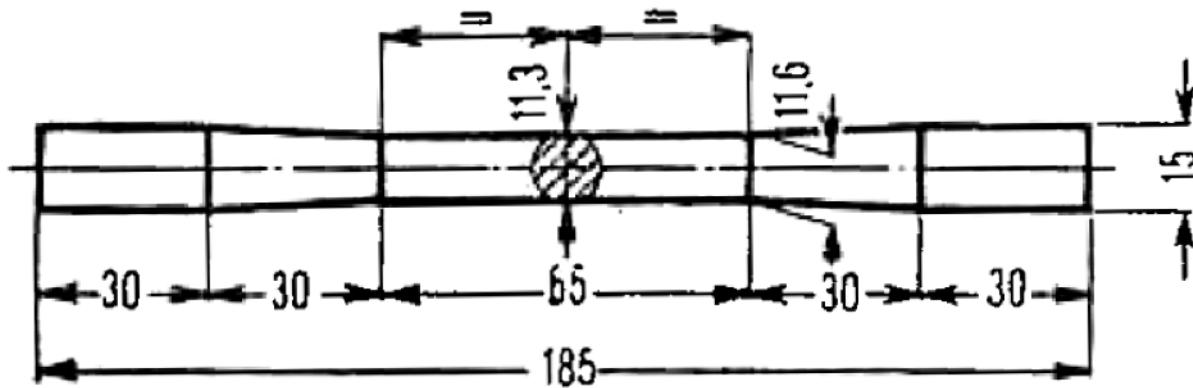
Specimen drawn from gravity die casting reference casting #1
